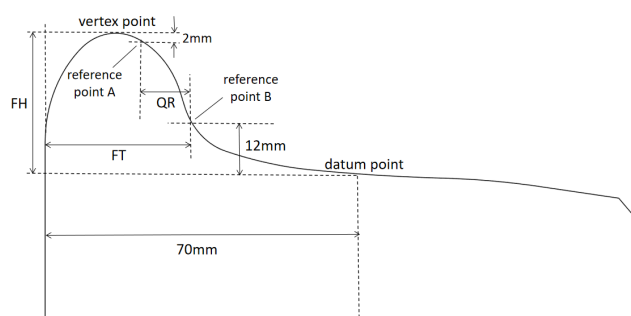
Definitions of wheel tread profile geometric parameters. FH: flange height; FT: flange thickness.
